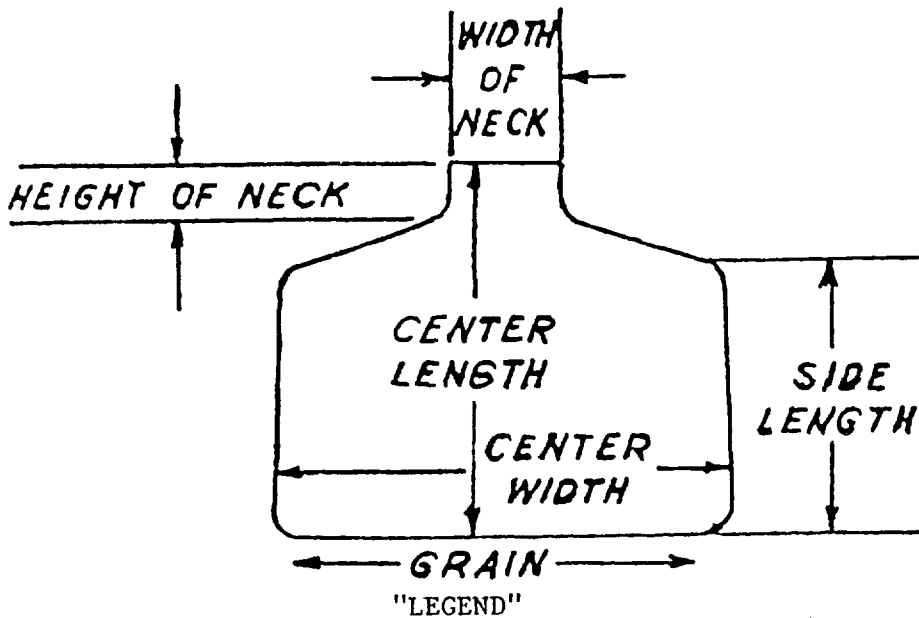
COAT, MAN'S, WOOL, WINTER
